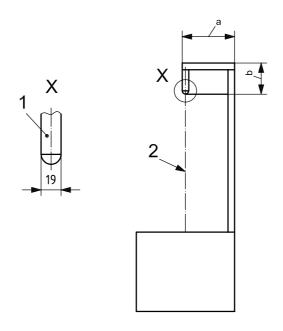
Seat-loading pad geometry — Moulded fibre glass construction
